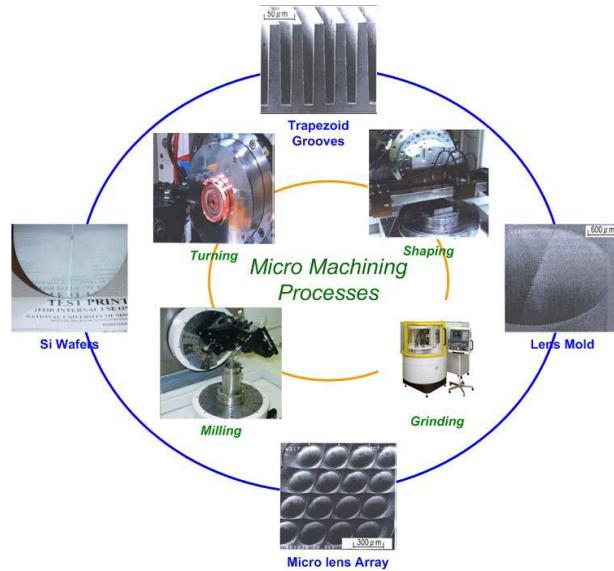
Micro manufacturing with conventional ultraprecision machine tools
